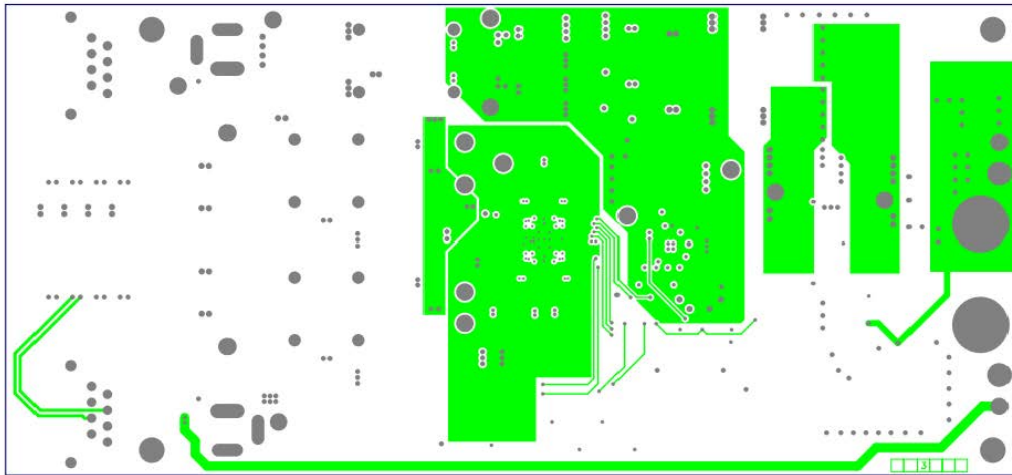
STEVAL-POE005V1 reference design PCB layer 4
